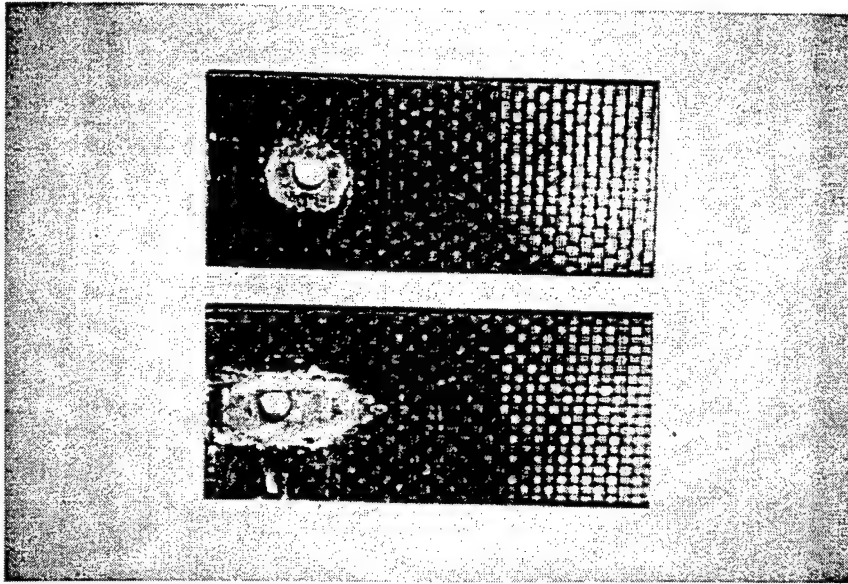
Disassembled Bolted Joint Showing Partial Shear-Out Failure: Specimen JB-4
